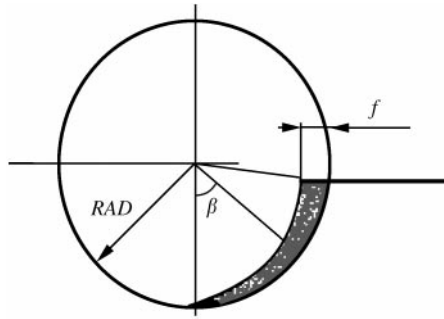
Schematic of feed and angular position in end milling in a vertical machining center.
